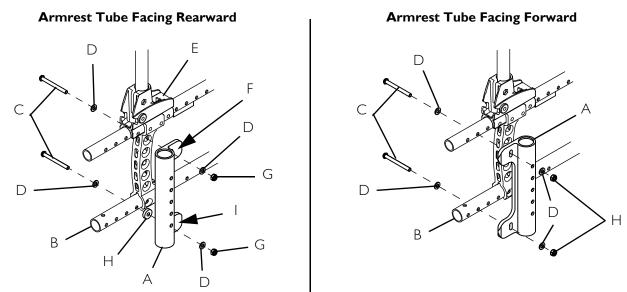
Installing the Optional Swingaway Padded Armrest Socket Assembly
